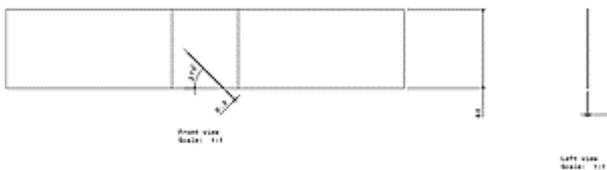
Figure Drafting view of aluminum sheet with crack & without patch
